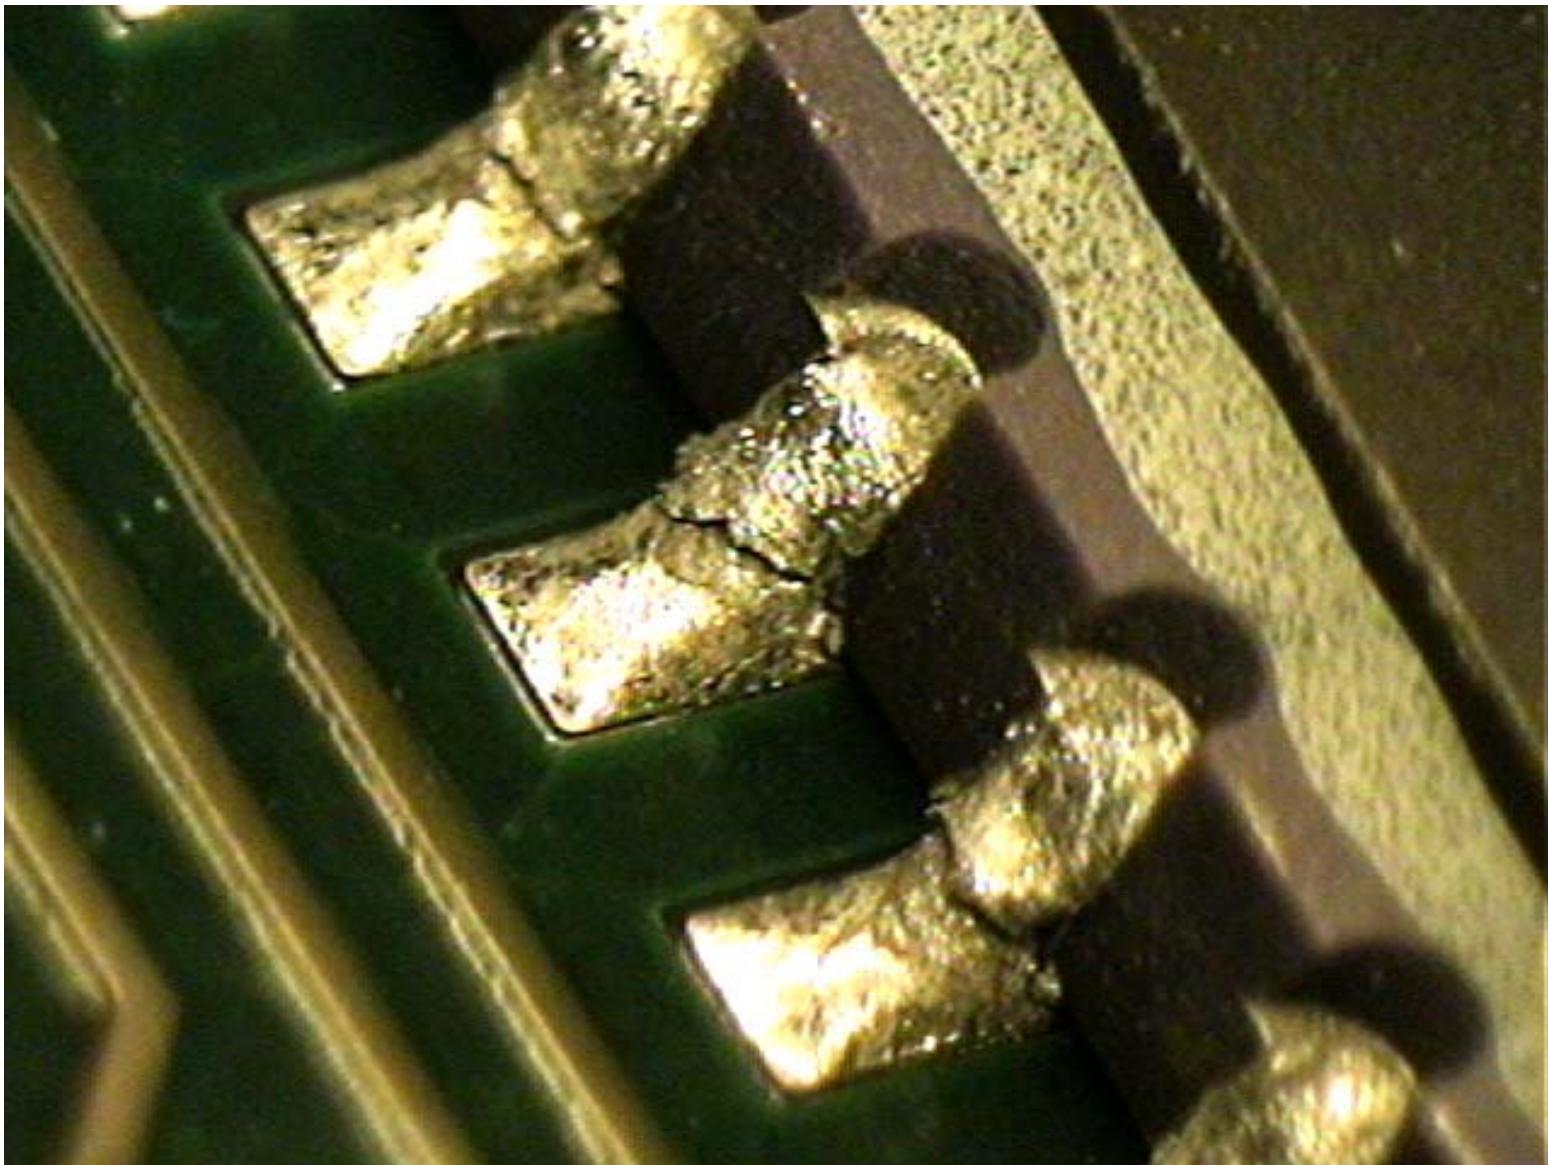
Vehicle ID 119, CLCC U13, SACB Solder/SnPb Component Finish, 75x
